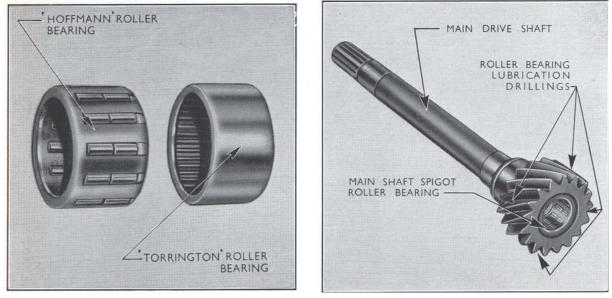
Main Shaft Spigot Bearings^{www.fordson-dexta.de} Main Drive Shaft and Bearing Assy. (Super Dexta)
